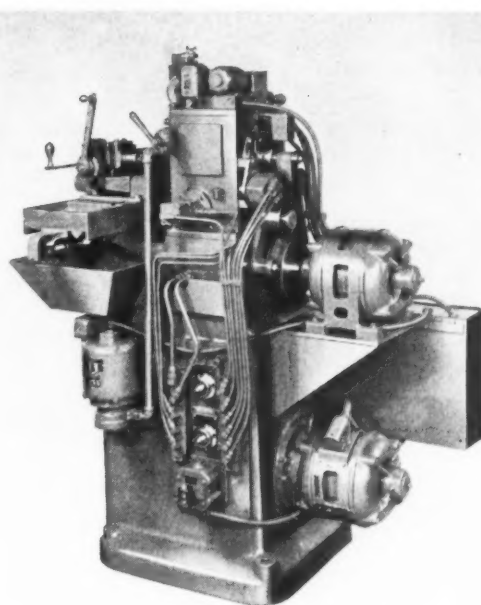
LeMaire Machine Designed for Grinding Channels in Aircraft Engine Connecting-rods
